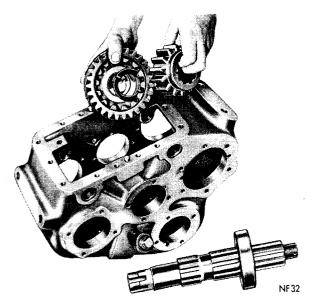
Removing or Installing Sliding Gear, Drive Gear and Spacer
